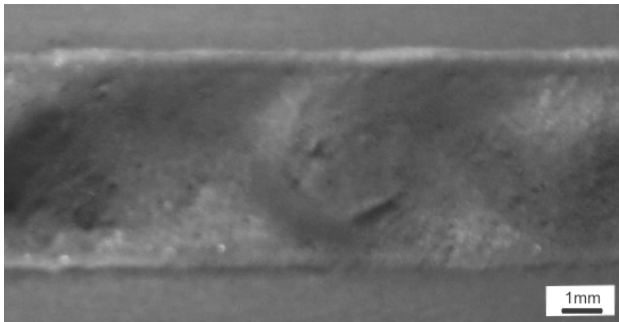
View of the MCMgAl12Zn1 casting magnesium alloy face of weld after laser treatment with VC, scan rate: 0.75 m/min, laser power: 2.0 kW
